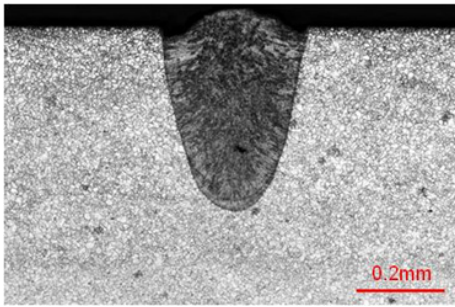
Cross sectional views of AZ31 laser weld at travel speed 500mm/s.
